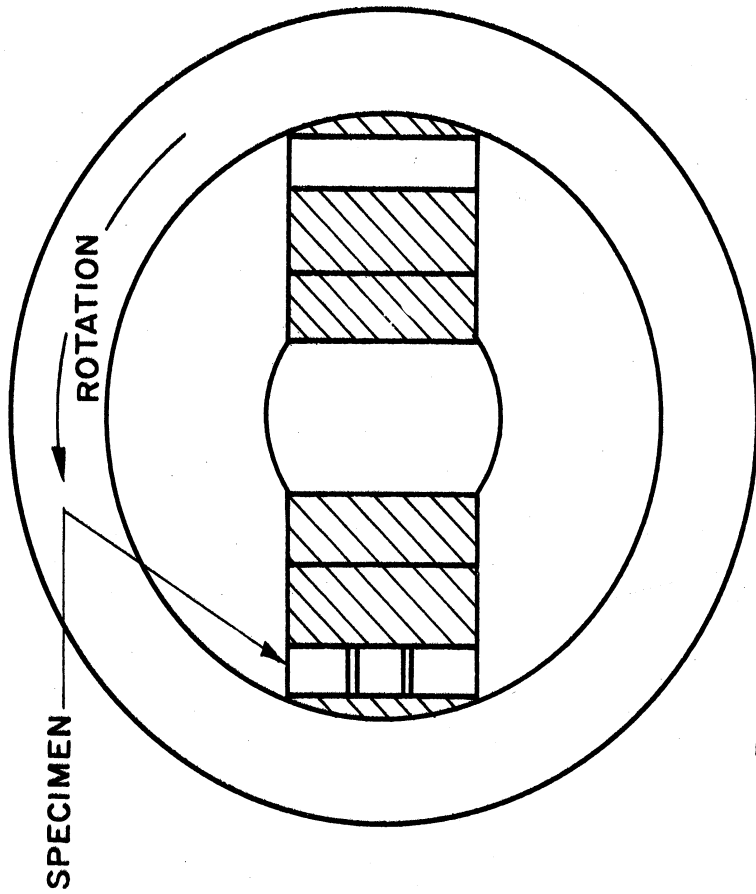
Tool holder, tool mounting, and specimen mounting.
